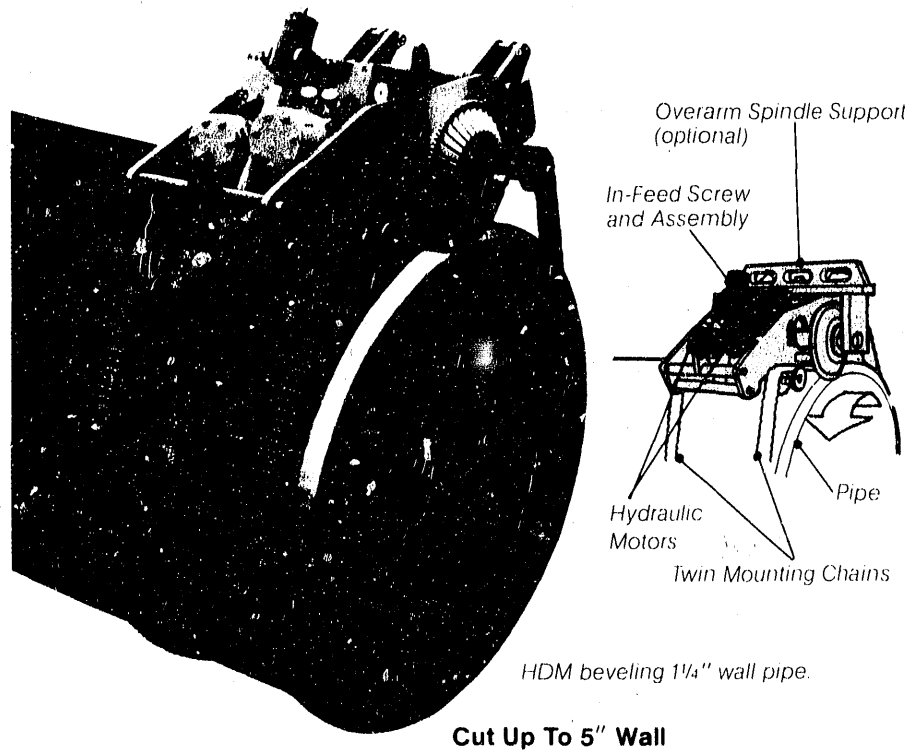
Outside-Diameter Cutting Mill Strapped on Workpiece (Taken from E. H. Wachs, 1989)
